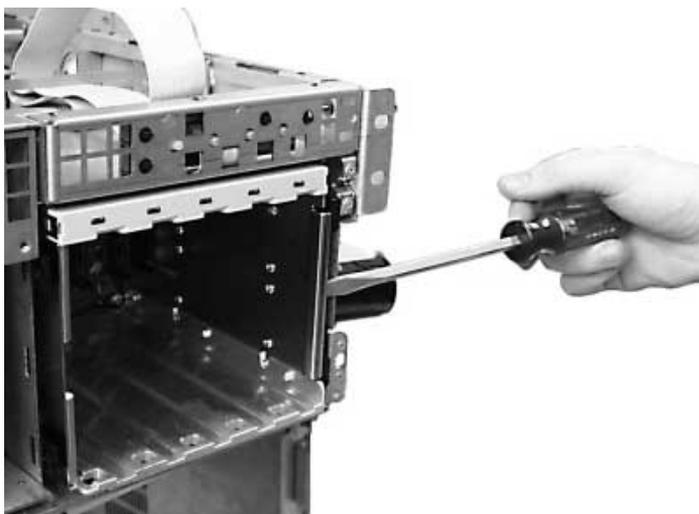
Removing the Hard Drive Bay from the Chassis
